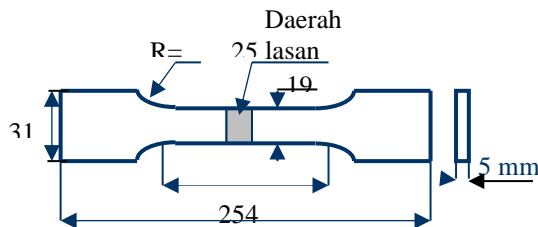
Dimensions of AWS A5.28 standard Static Tensile Test Specimens
